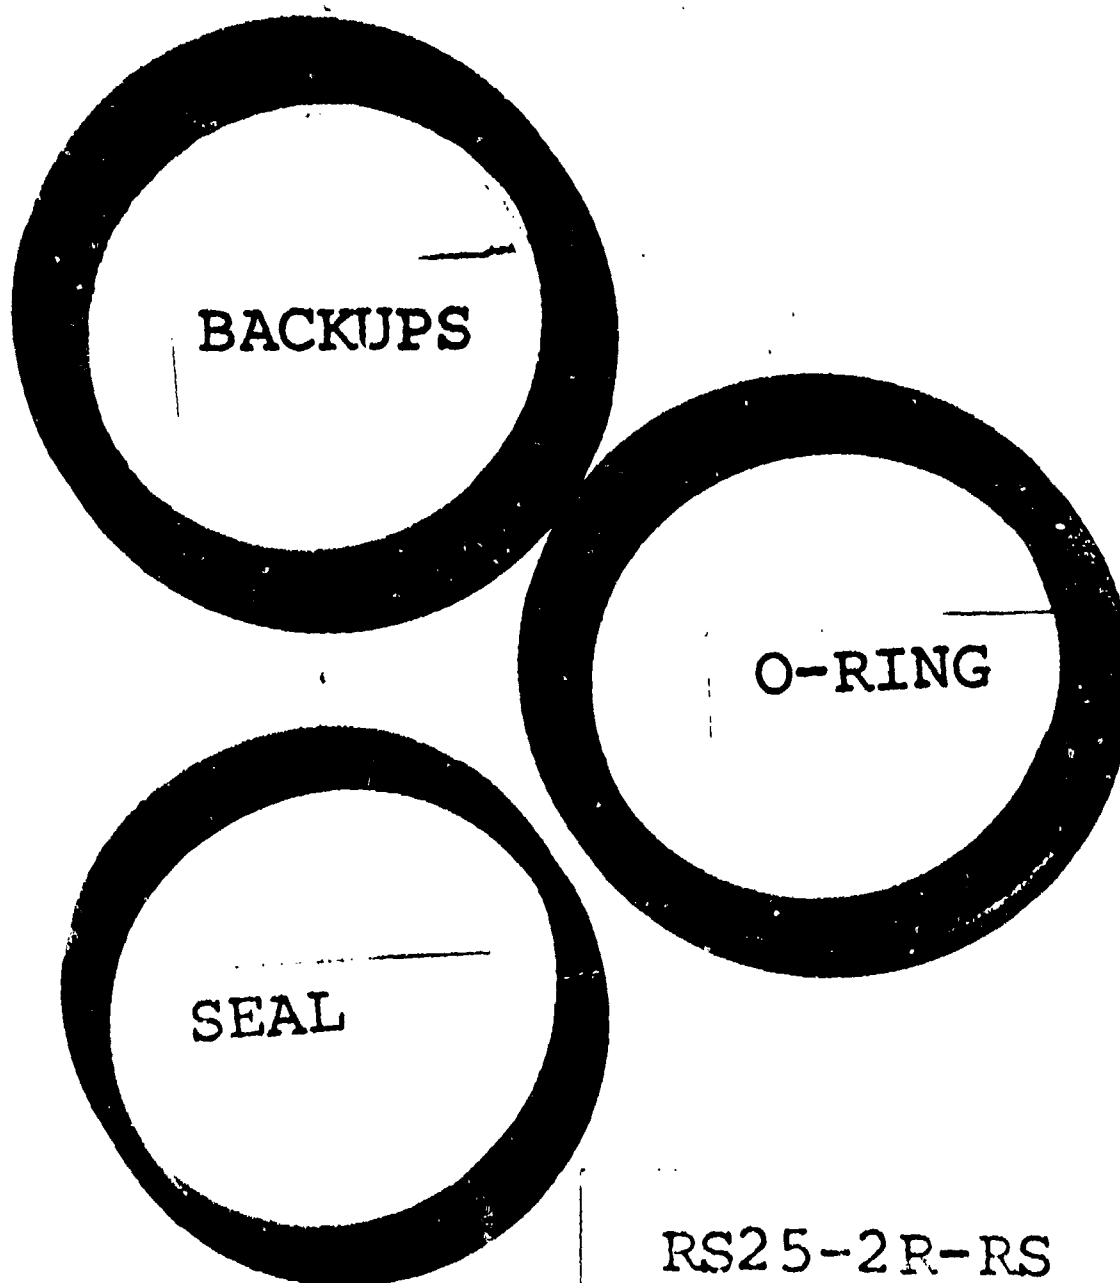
Candidate RS25, After Single Stage Rod Seal Screening Test. Seal and backup material is Shamban Code 14.
